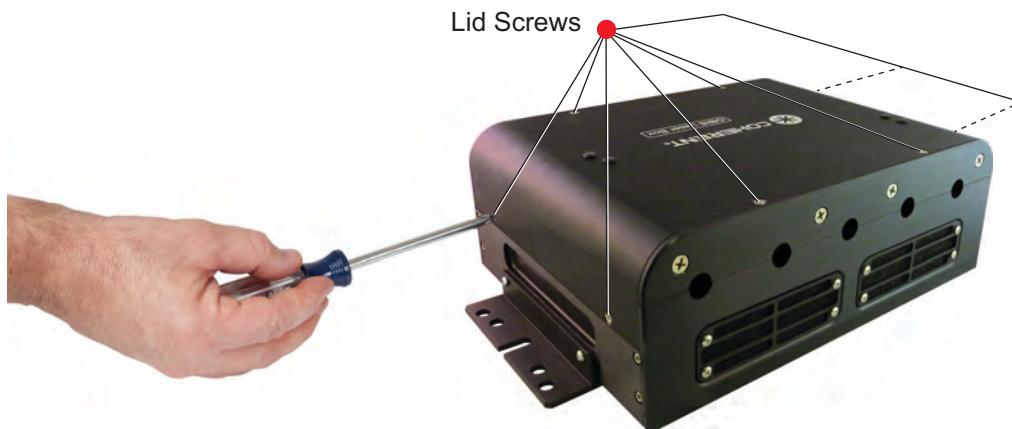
OBIS Laser Box Removing the Laser Box Lid
